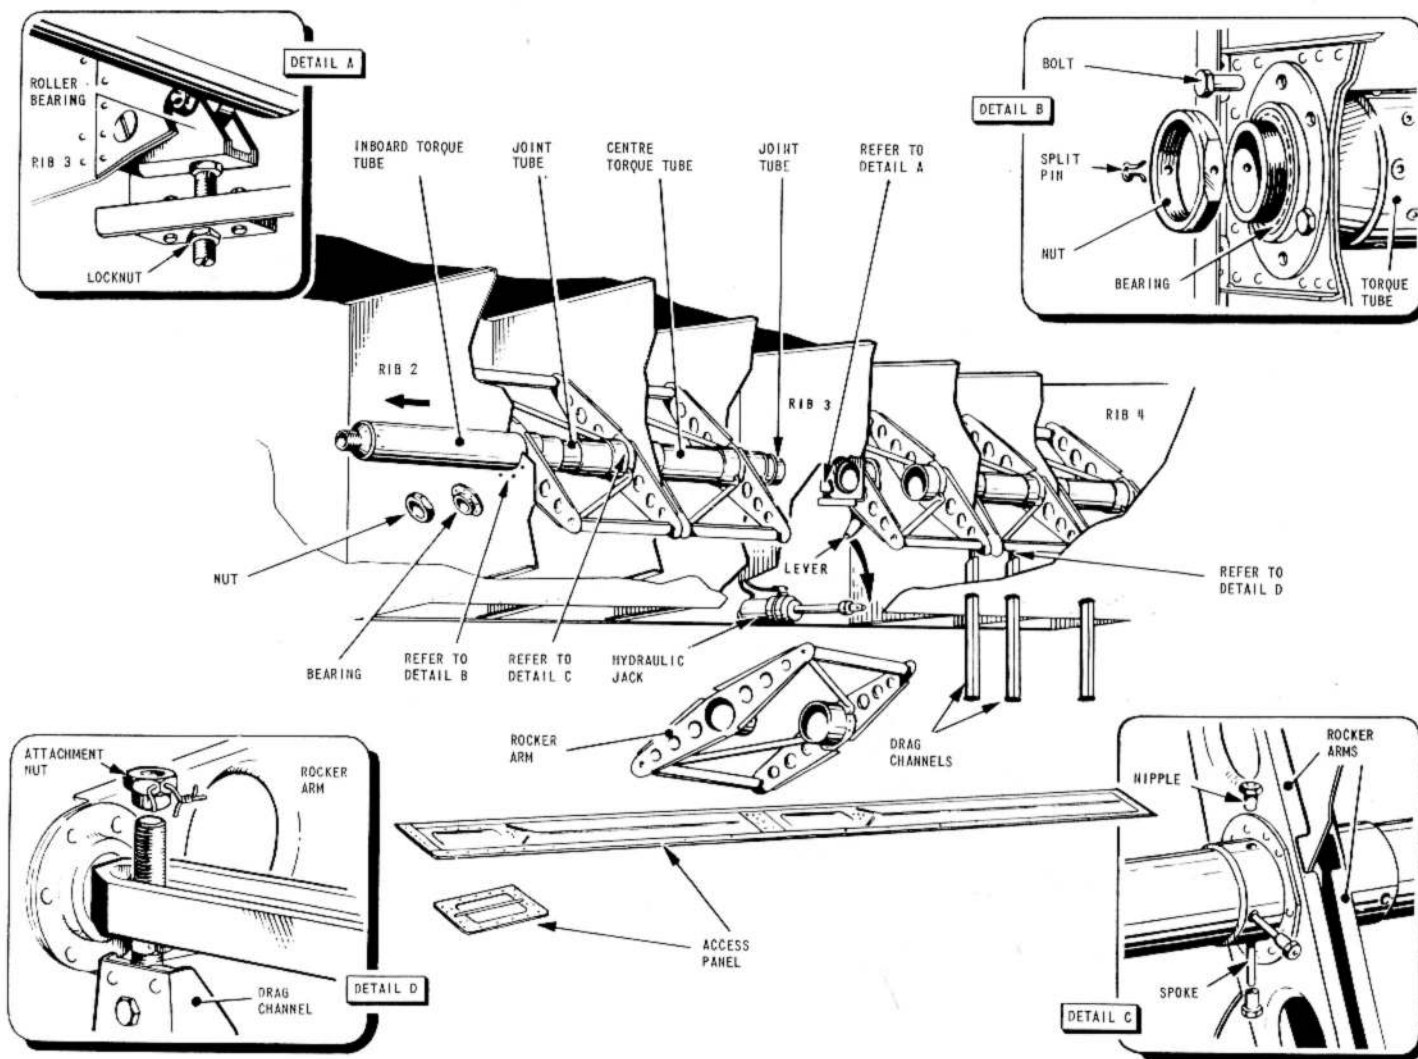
AIR BRAKES - REMOVAL AND ASSEMBLY
